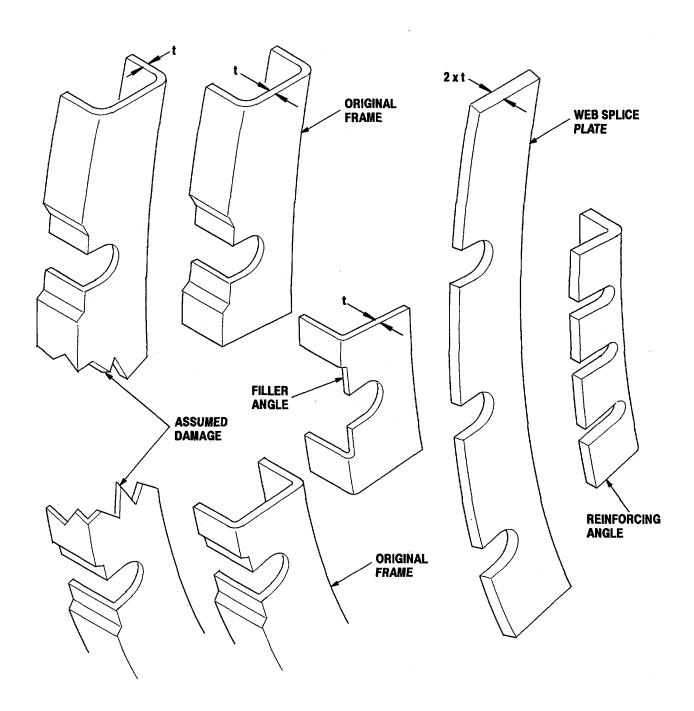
Repair Concept 3: Frame Isometric Exploded View
